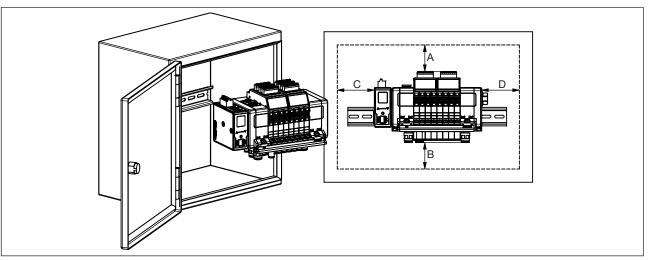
Recommended minimum clearances when installing on a standard rail in the control cabinet
